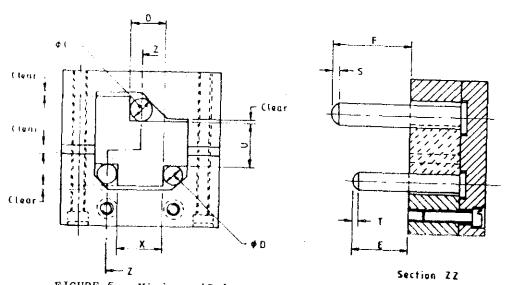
Minimum 'Go' gauge for socket-outlet
